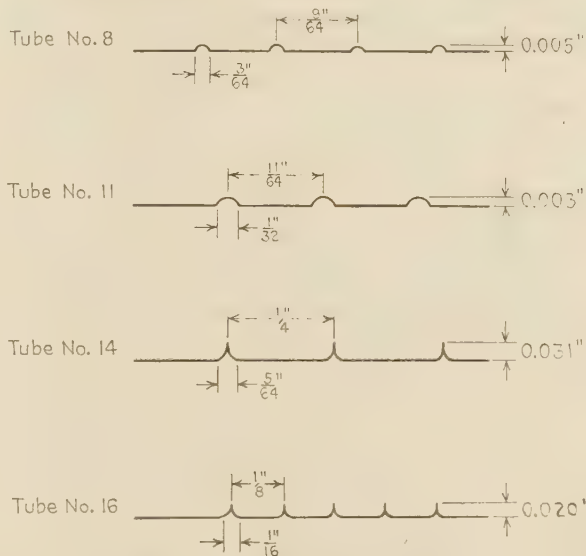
(a) DIMENSIONS OF CORRUGATIONS ON INSIDE OF TYPICAL TUBES
